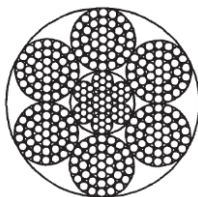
Wire Rope Cross Section (6 × 37 - Steel Core)^[17]
